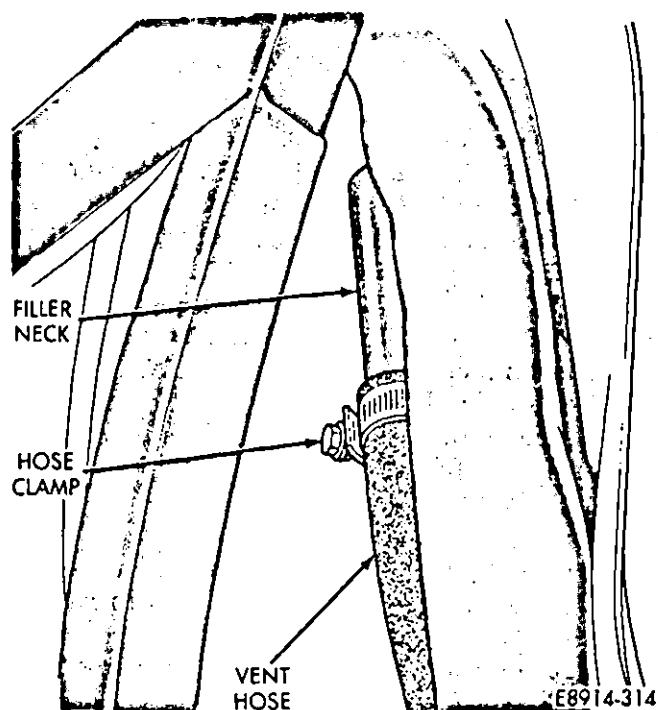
Fuel Filler Vent Hose Removal/Installation
